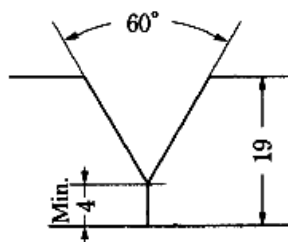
Butt Weld Test Assembly for Submerged Arc Welding (Unit: mm)
